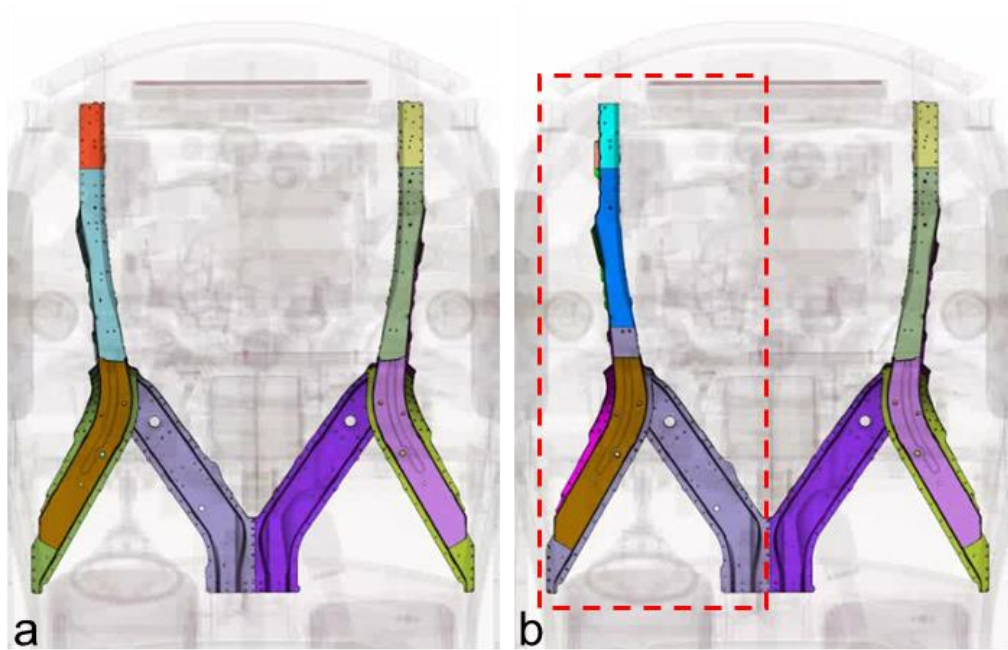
Tailor-welded hot stamped front end module demonstrating the controlled folding behaviour of the crush tip region and low severity of spot weld failures.
